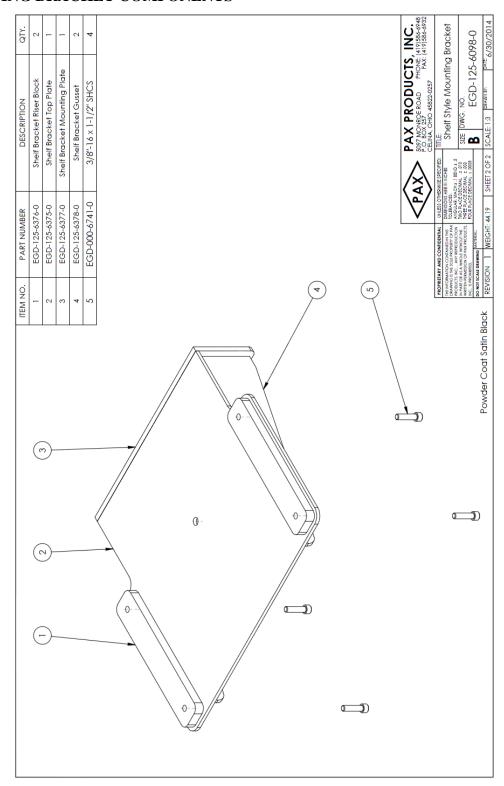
EGD-125-6098-0 SHELF STYLE MOUNTING BRACKET
